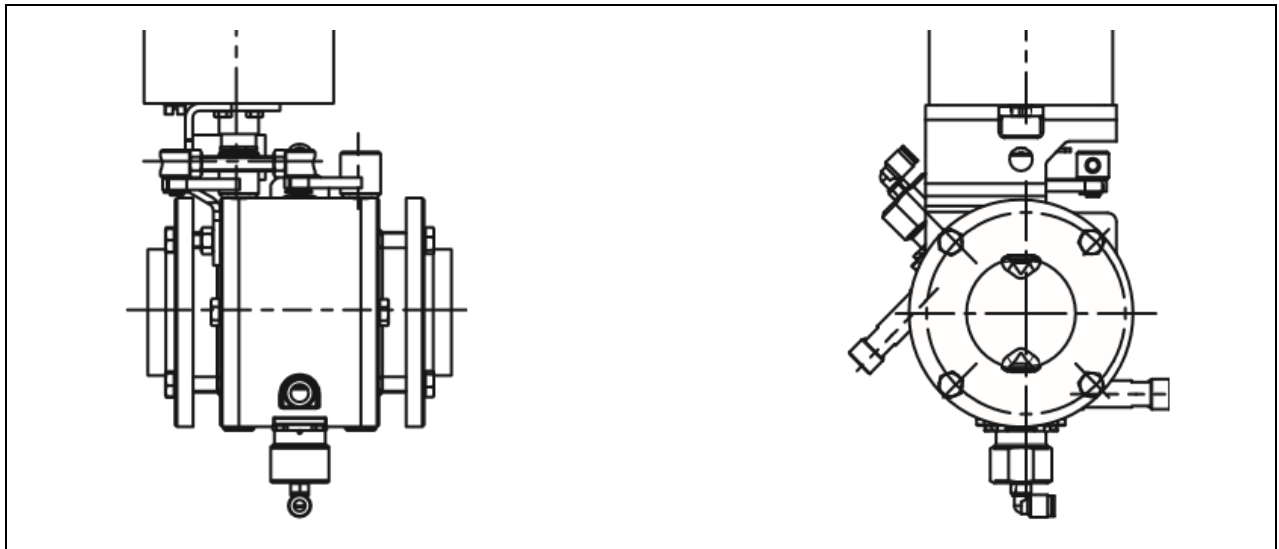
Installation position of leakage butterfly valve with pneum. Actuator
